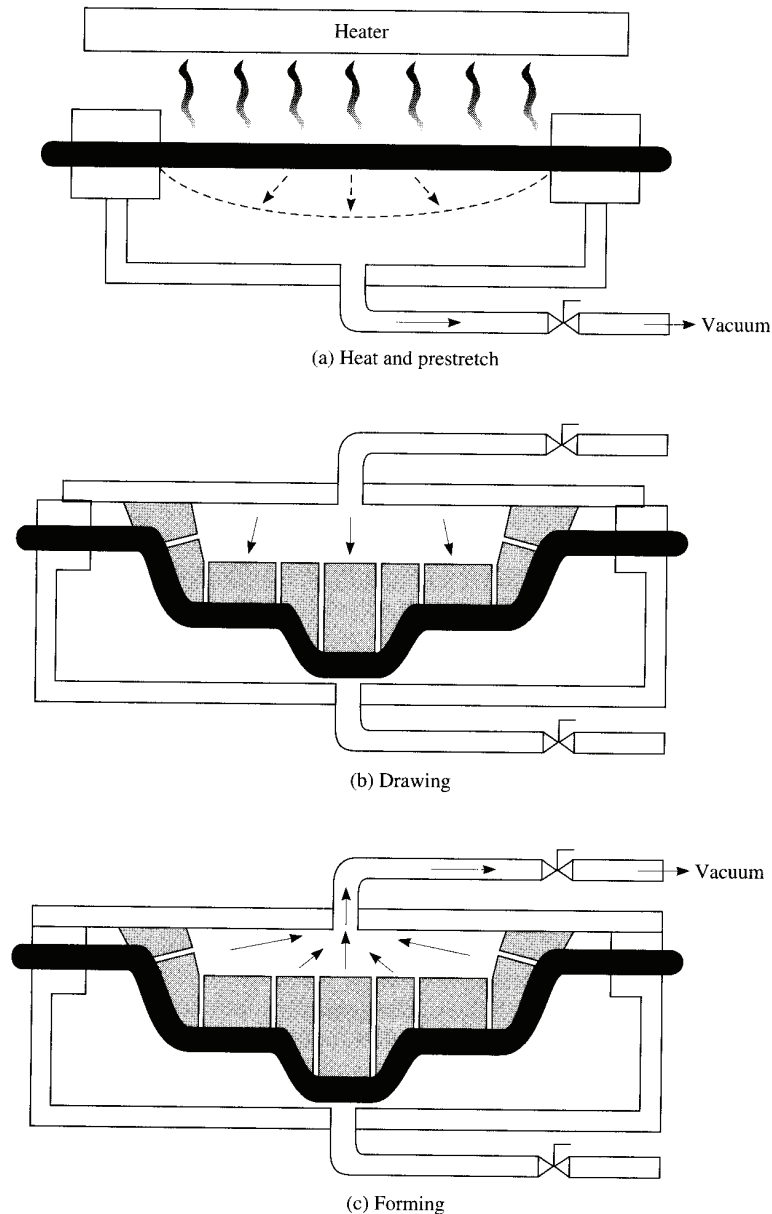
Snap-back forming showing prestretching, drawing, and forming steps.
